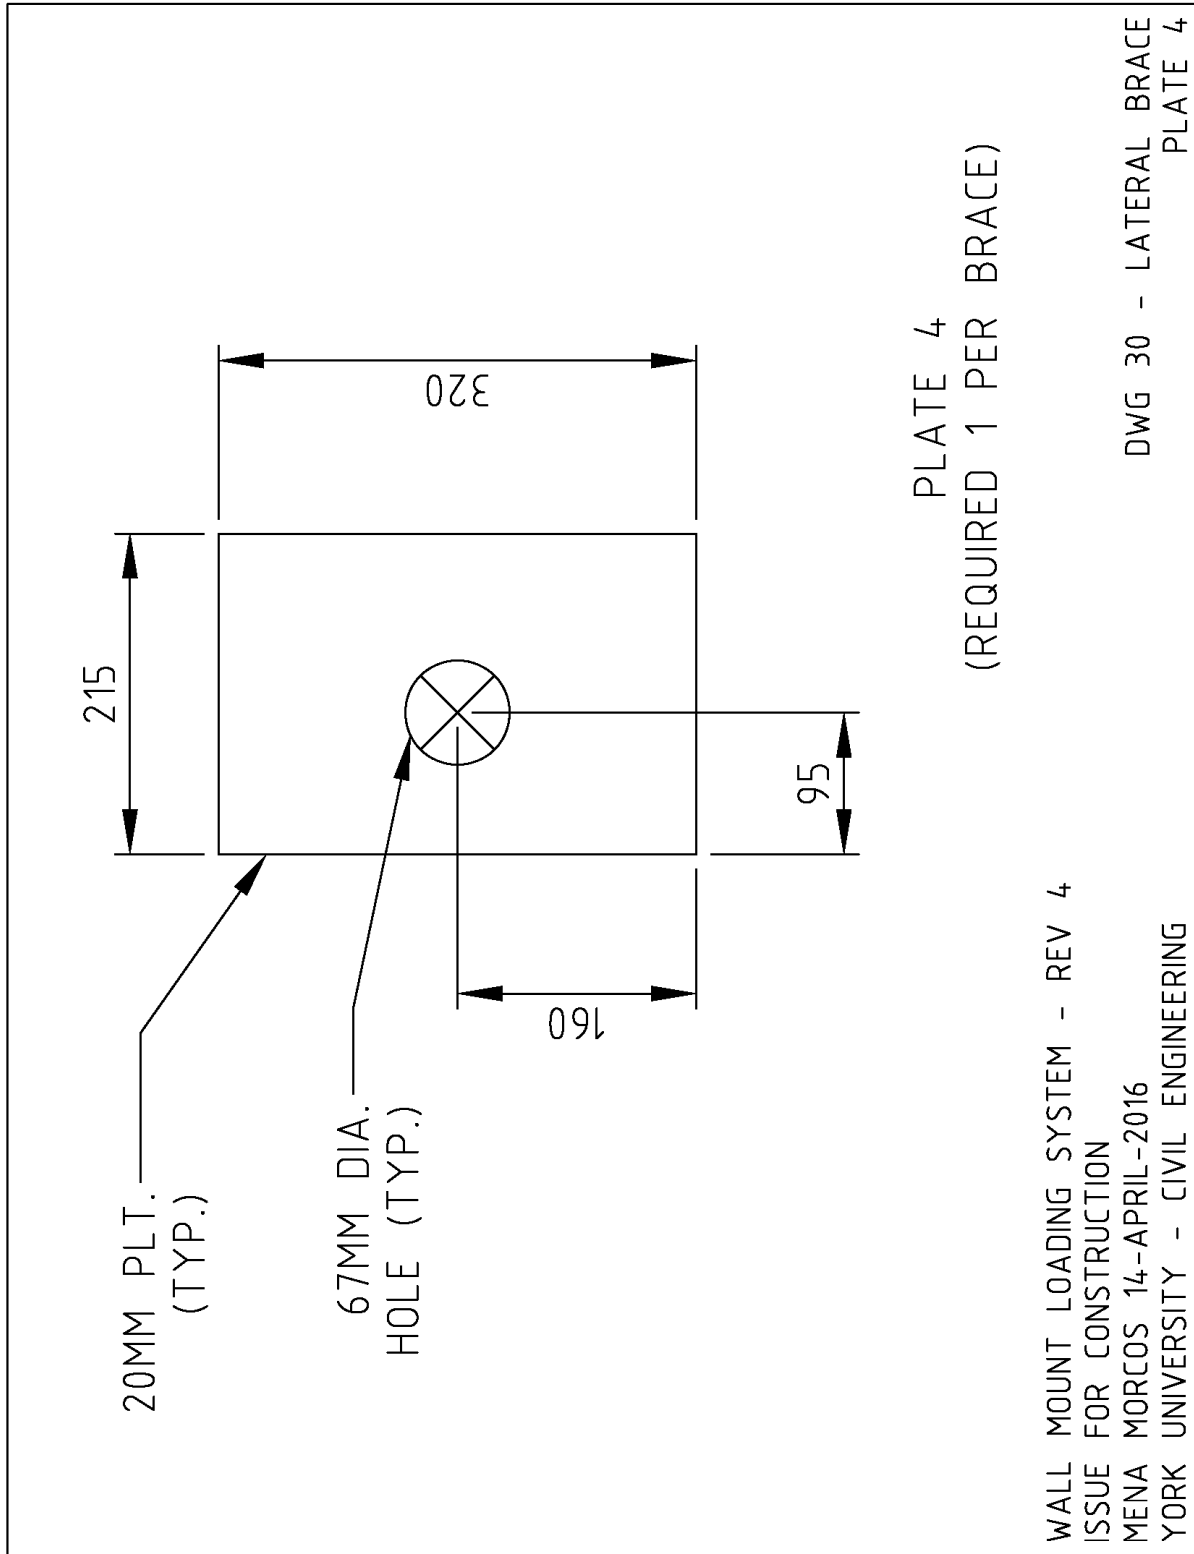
Wall mount loading system design and fabrication drawing – Drawing 30.
